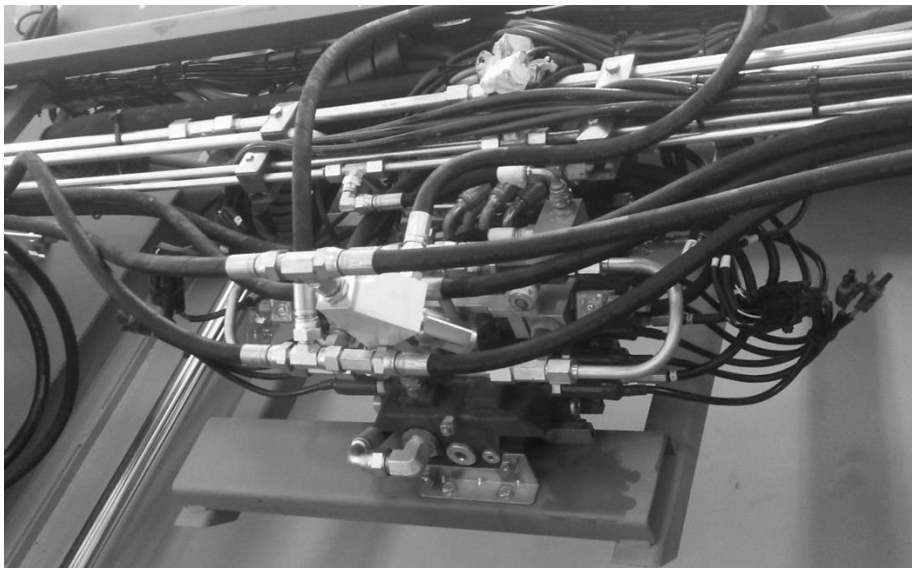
Single Sun LoadMatch MBDPDHN installed on a directional control valve Parker VPL
